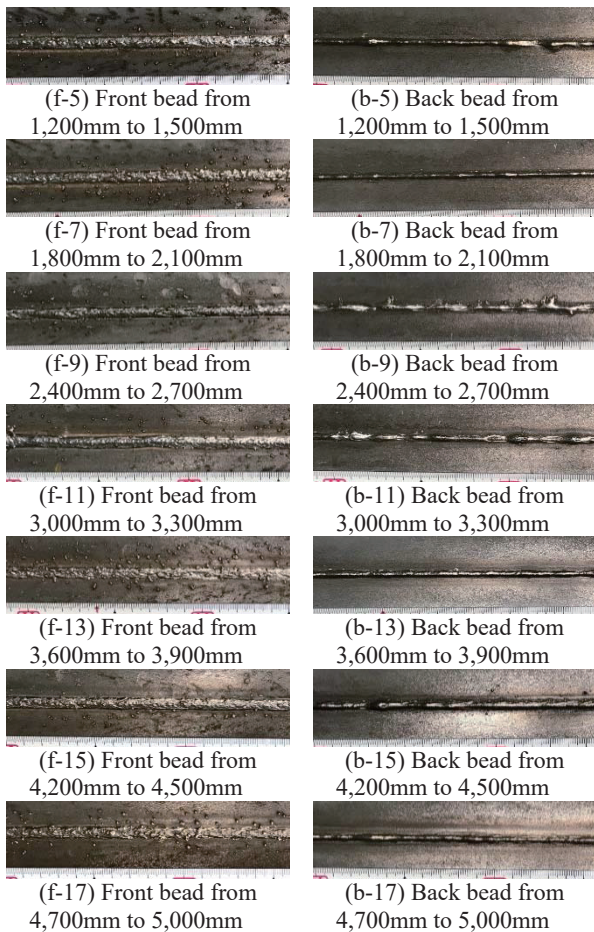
Weld bead appearance of butt welded joint. (Initial gap 0mm).
